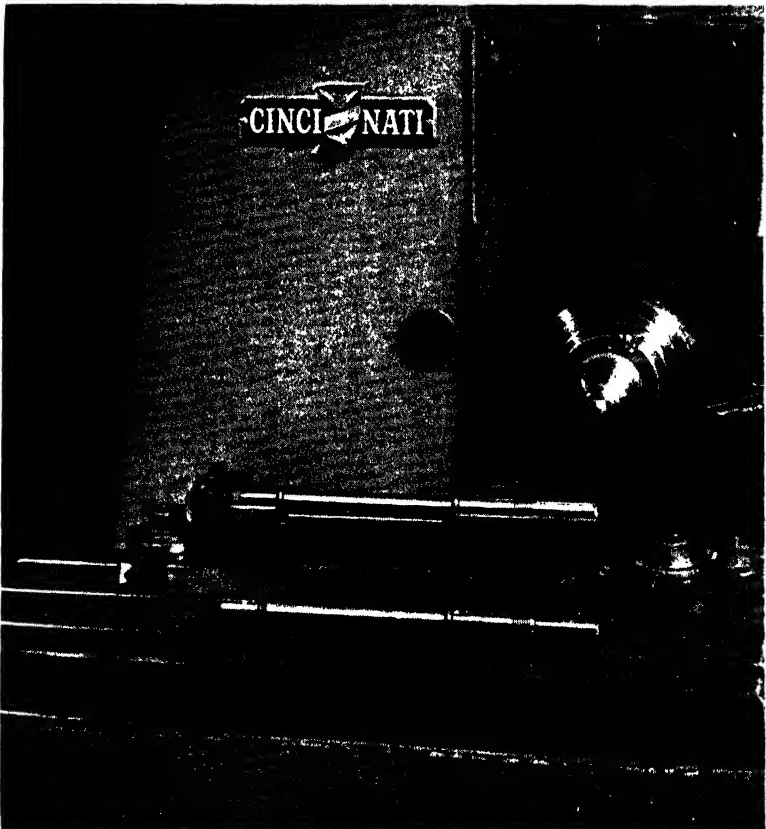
Milling Two Woodruff Keyways in Gear-shafts
